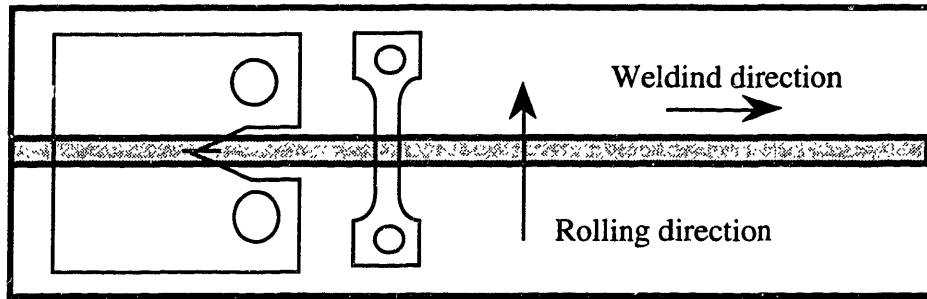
Specimen orientation with respect to the welding and rolling direction.
